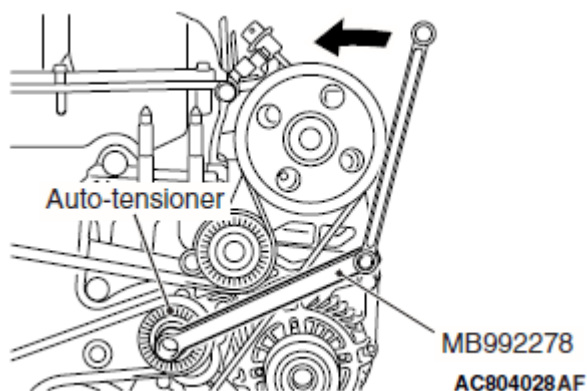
Rotating Pulley Bolt Of Auto-Tensioner With Special Tool MB992278
